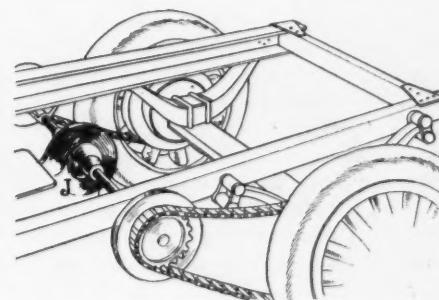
ILLUSTRATING A JACKSHAFT.
